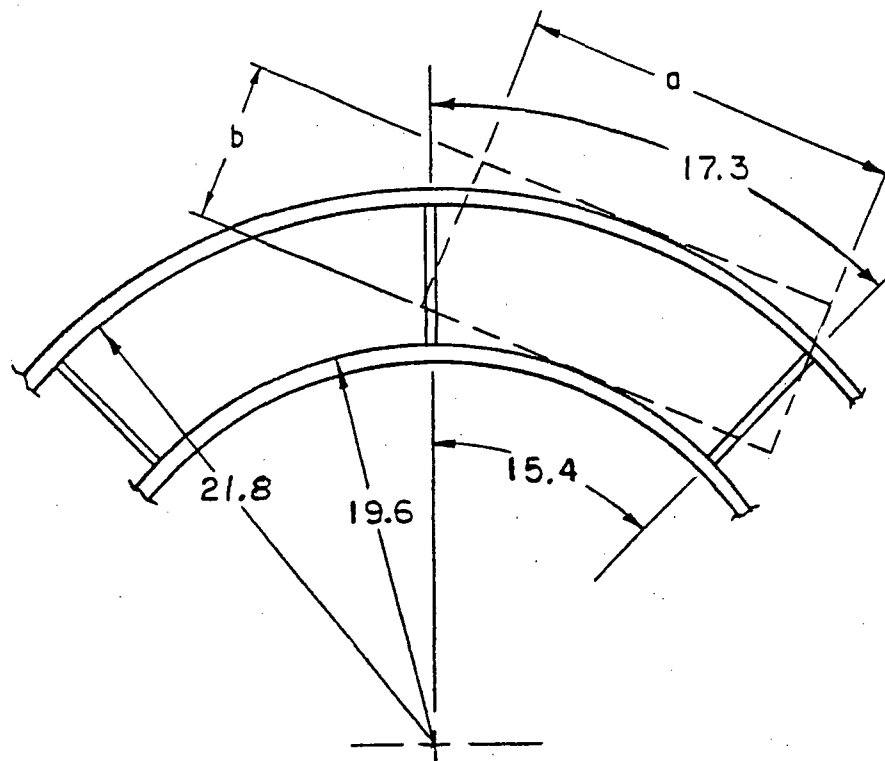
Expansion Tank Stiffener Load Geometry
